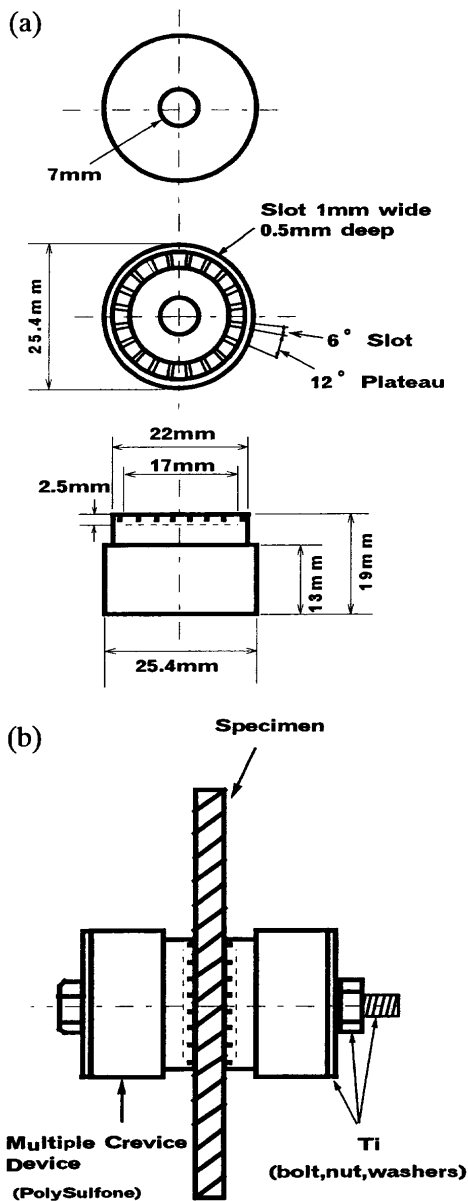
Scheme of crevice corrosion test specimen. (a) Multiple crevice device, (b) assembled specimen.
